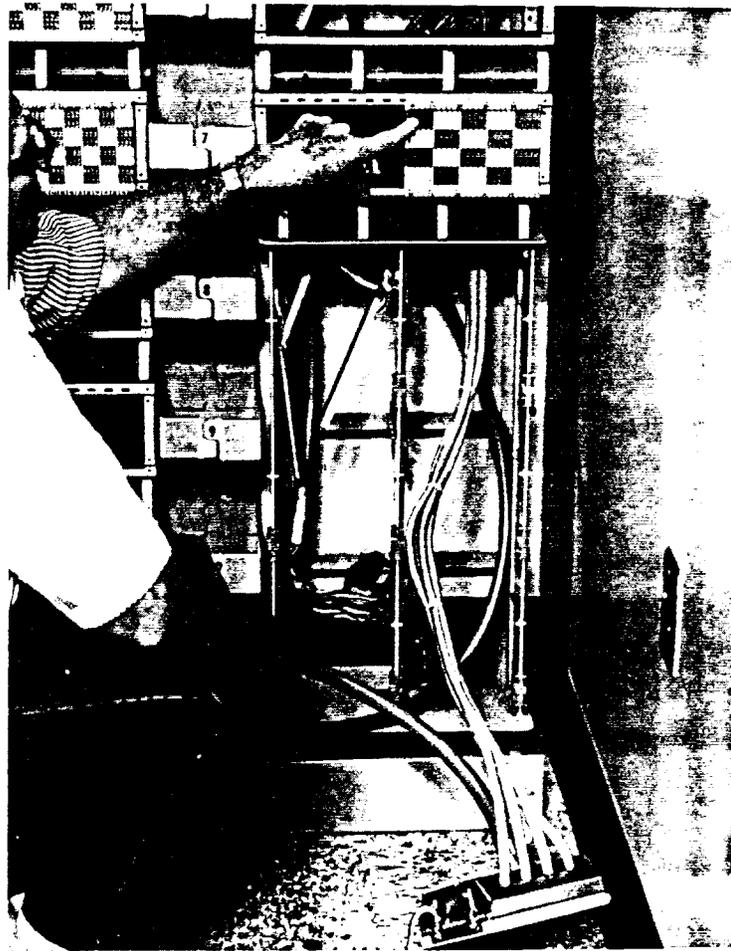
Mounting of 112-Type Block Assembly on Mini *COSMIC* Frame (Front View)
